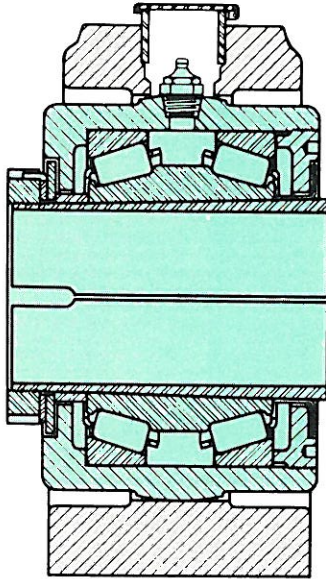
Section through Expansion Type Pillow Block showing the straight bore in the cap and base. This design is used in the adaptor for bearings with shaft diameters of 1¹⁵/₁₆" to 3⁷/₁₆" inclusive.
